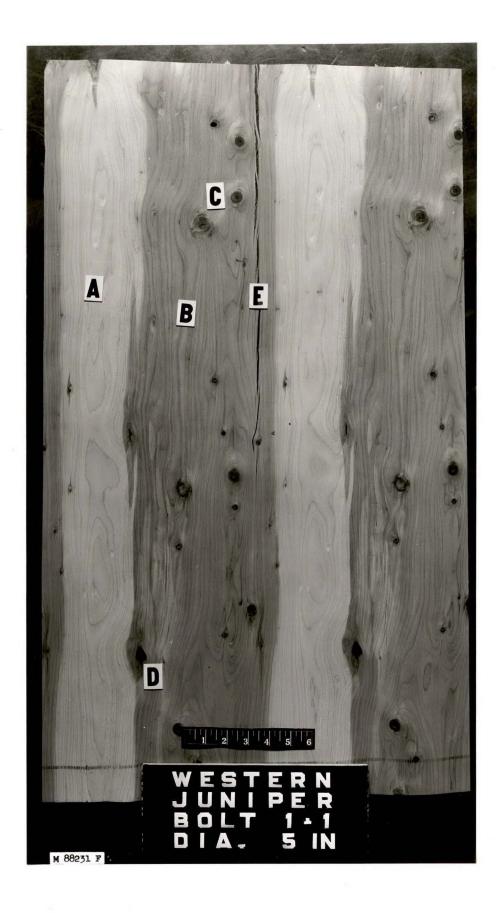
A sheet of 1/16-inch rotary-cut veneer from near outside of bolt No. 2-1 showing:
